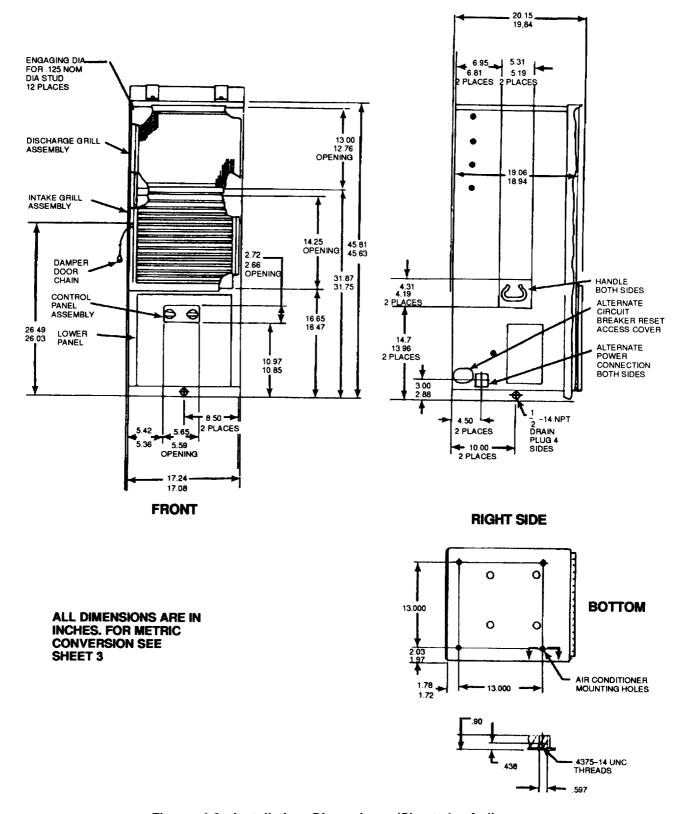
Installation Dimensions (Sheet 1 of 4)
